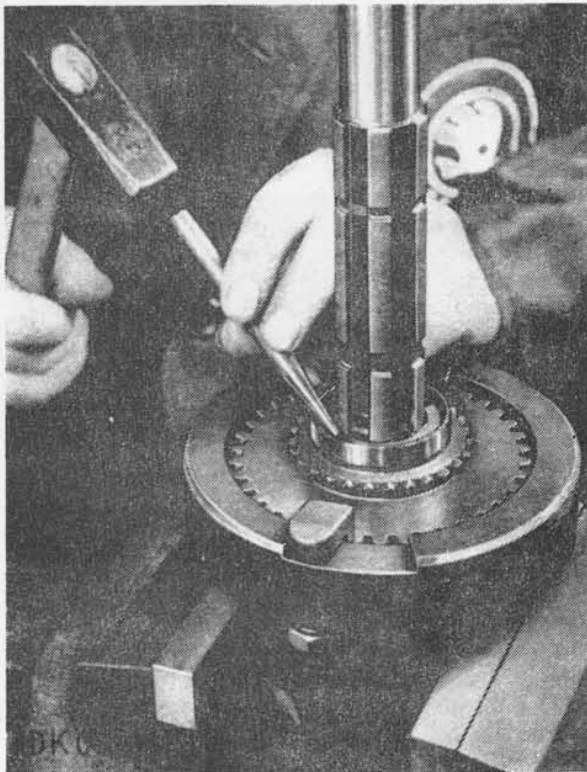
/3 - Locking 1st-speed Gear in Position (turning the ring with a drift) with the Pinion Clamped in MP 3-105 or MP 3-111 Jig
